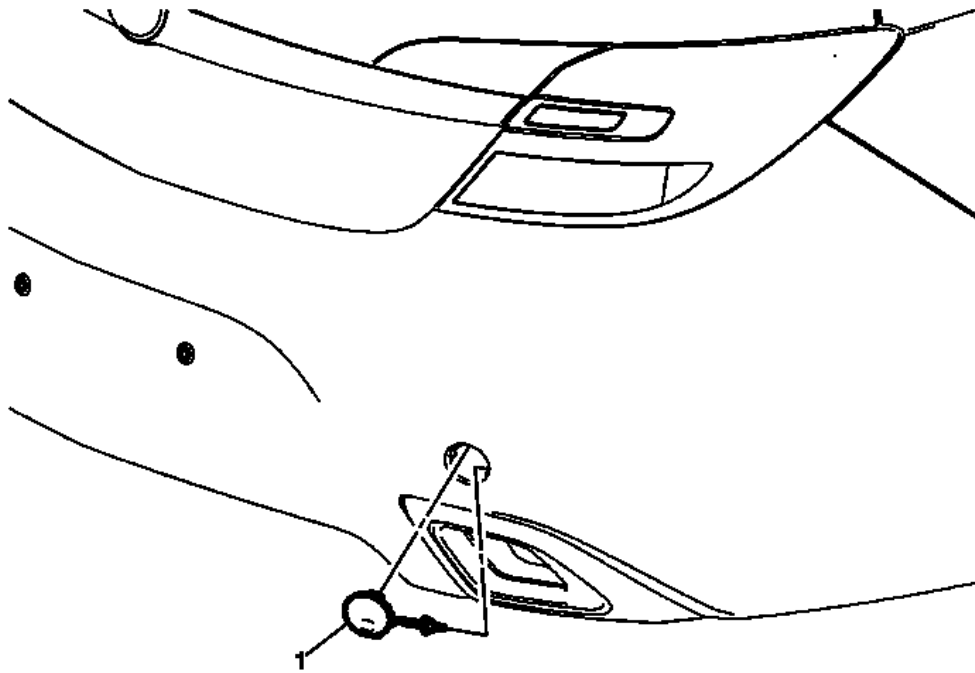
Rear Bumper Fascia Tow Eye Access Hole Cover
